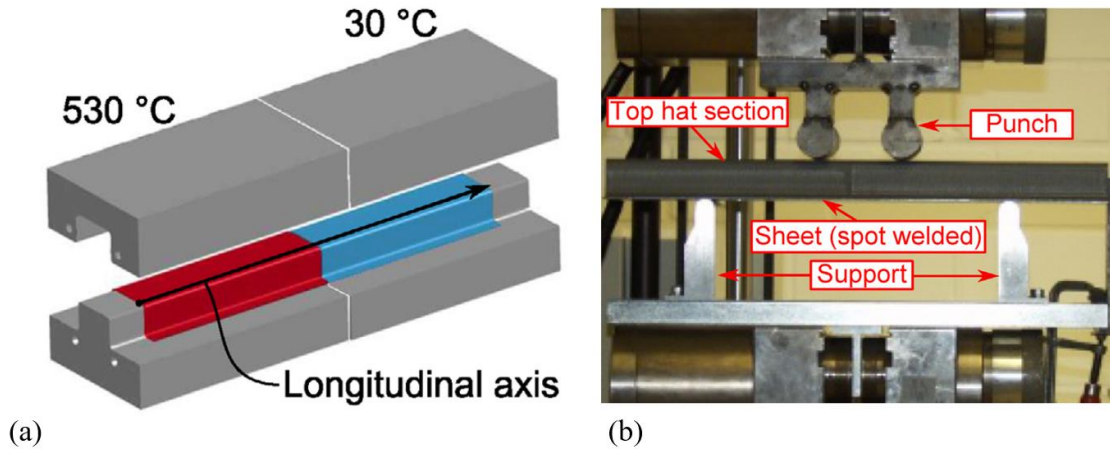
(a) Axially tailored IDH rail forming tool, (b) Four-point bend test setup, adapted from Eller *et al.* [22].
